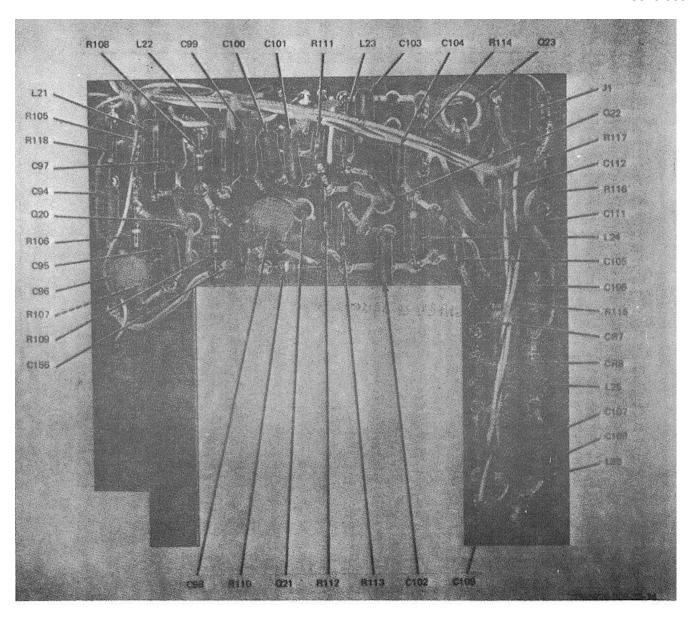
Oscillator Control C-4311/PRC-47 (A8A7), Card Assembly E6.
